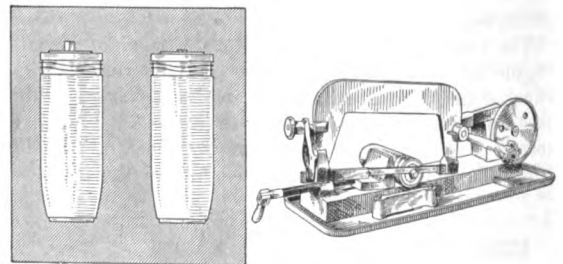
FINISH-TURNING THE FORGING IN CONVERTED BRIDGEPORT AUTOMATIC MACHINES
